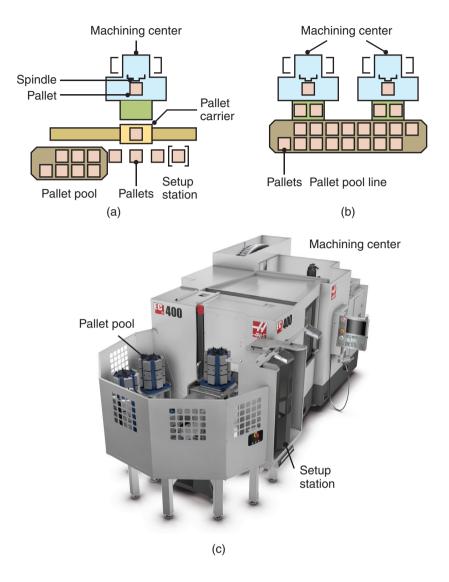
(a) Schematic illustration of the top view of a horizontal-spindle machining center, showing the pallet pool, setup station for a pallet, pallet carrier, and an active pallet in operation (shown directly below the spindle of the machine). (b) Schematic illustration of two machining centers, with a common pallet pool. (c) A pallet pool for a horizontal-spindle machining center. Various other pallet arrangements are possible in such systems. *Source:* (a) and (b) Courtesy of Hitachi Seiki Co., Ltd., (c) Courtesy of Haas Automation, Inc.
